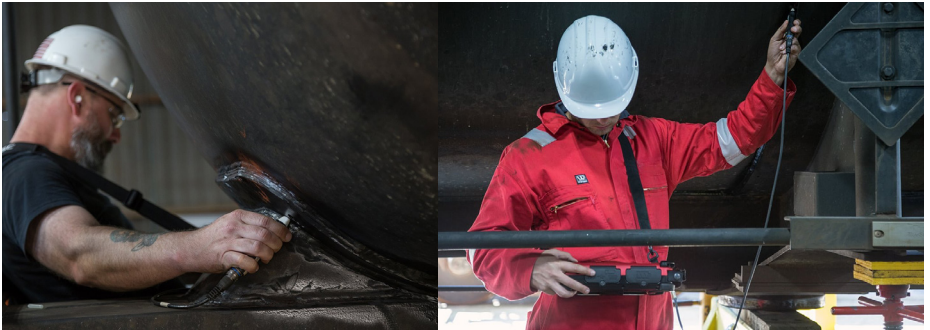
Sensu 2 ACFM probes with the Amigo 2 for rail tank car weld inspection.
